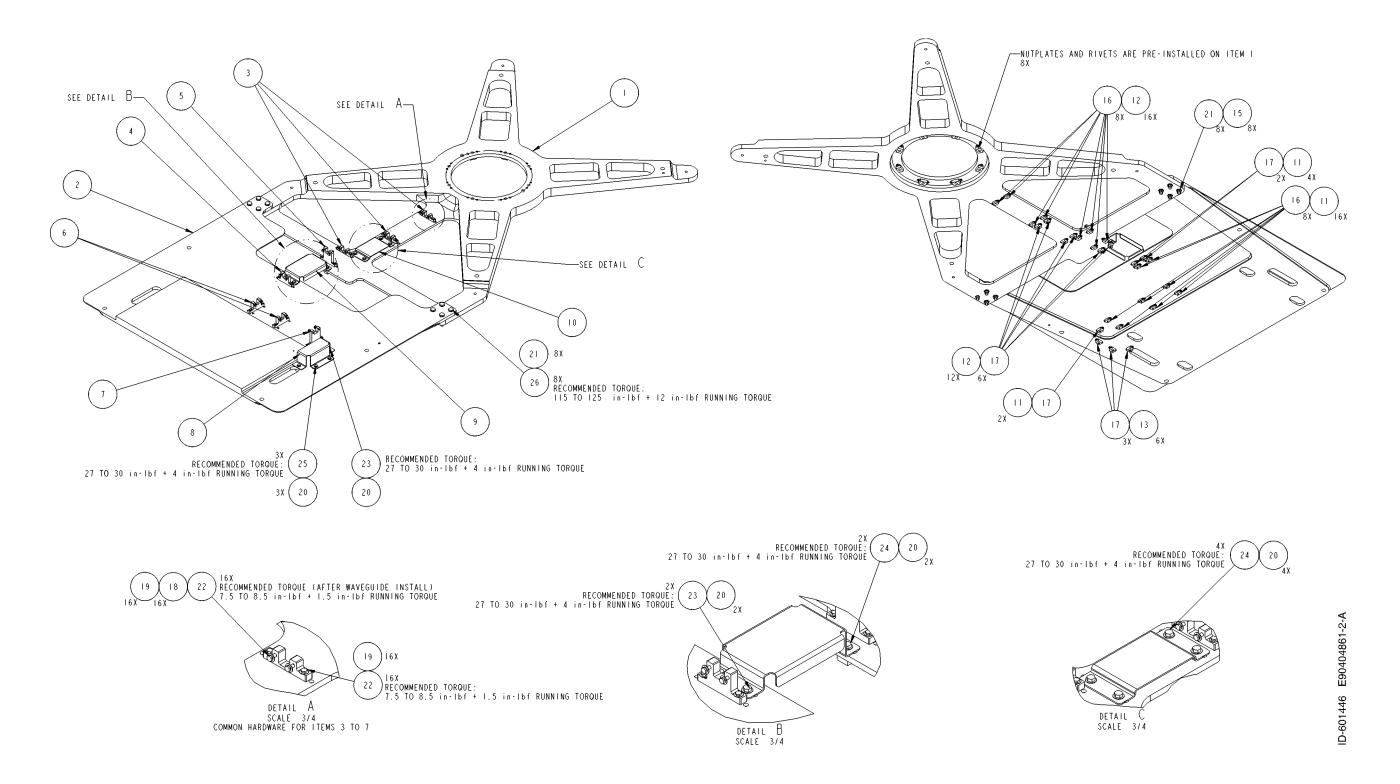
(Sheet 2 of 4) LAIM Outline and Installation Drawing (90404861, REV A)
